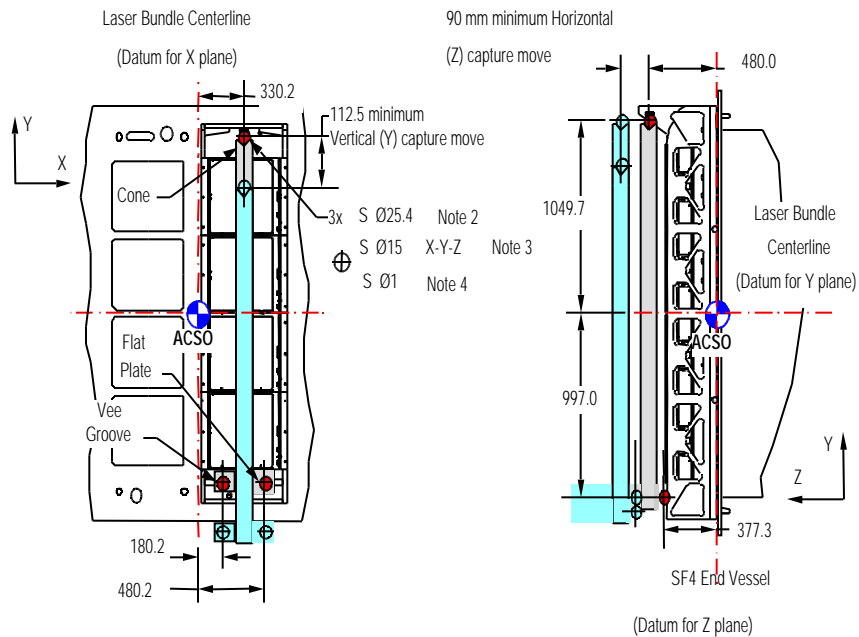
Interface Control Drawing showing location of kinematic couplings to the ACSO for the SF4.
